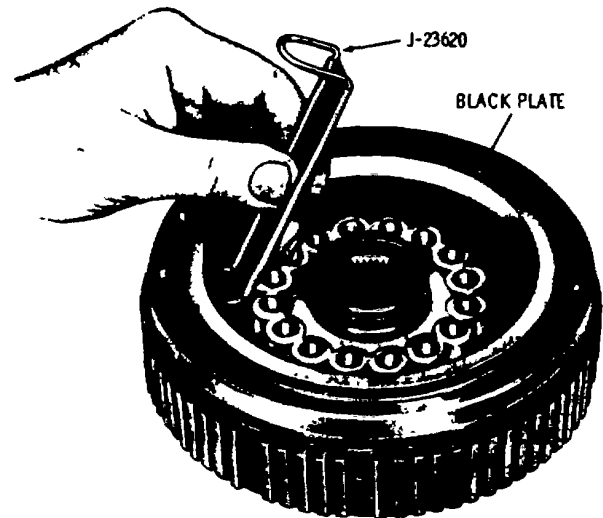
Removing (or installing) fourth clutch spring retainer snapping
